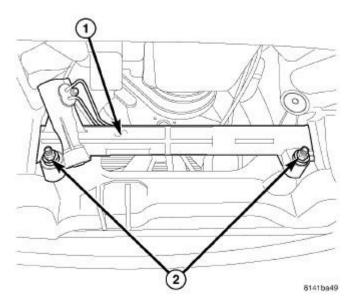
GEAR MOUNTING BOLT Courtesy of CHRYSLER LLC
